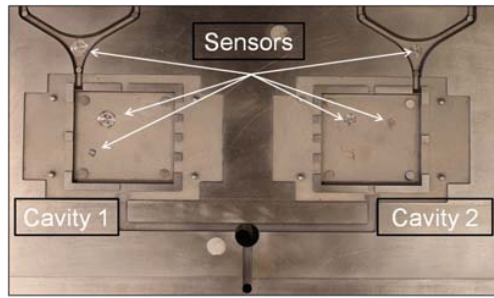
Molding tool with two cavities with mounted temperature and pressure sensors
